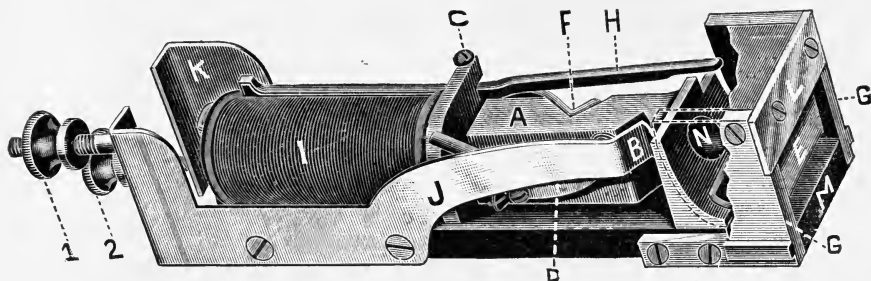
Western Telephone Construction Co.'s New Drop and Jack.
